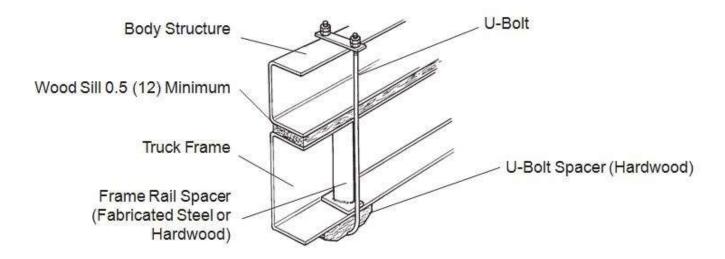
Acceptable U-Bolt Mounting with Wood and Fabricated Spacers
